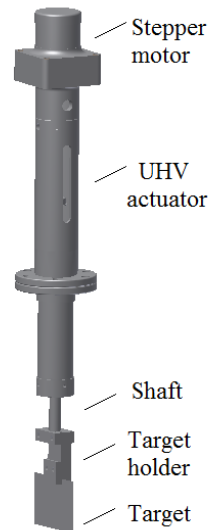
The ultra high vacuum actuator with the shaft, target holder, target and stepper motor attached.
